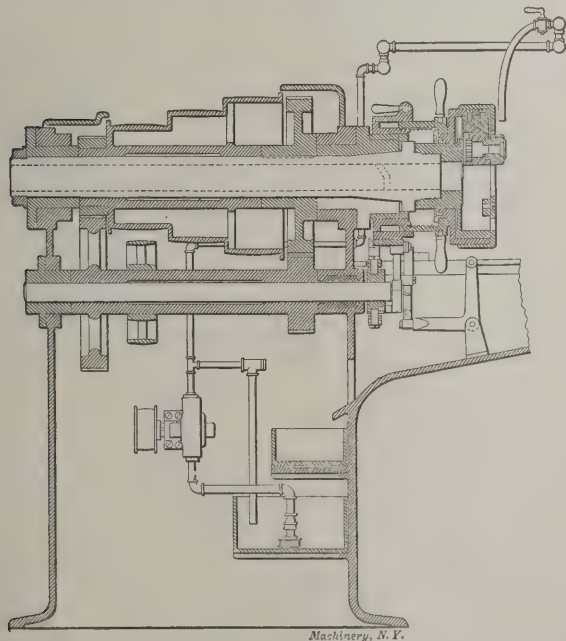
Sectional View of Mechanism of Bolt Cutter.
